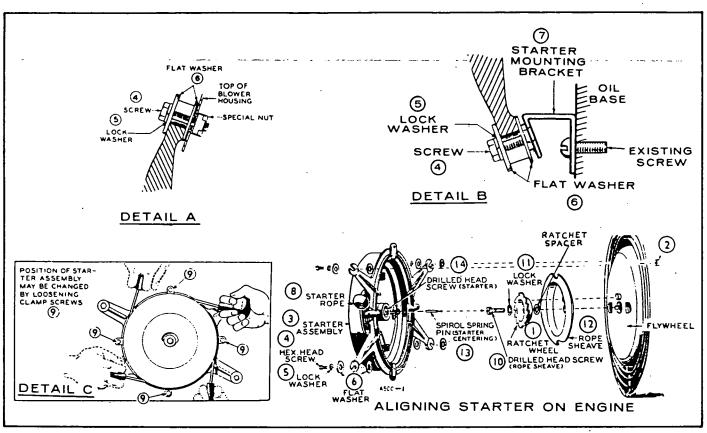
INSTALLATION OF READI-PULL STARTER
